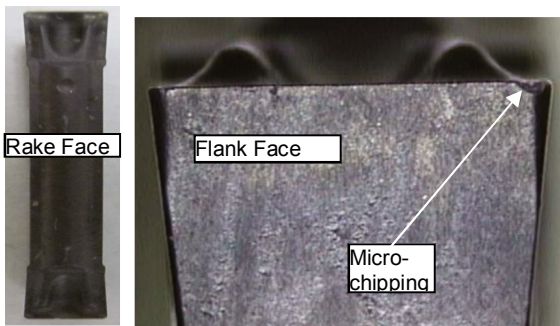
Flank wear for Tools 9 in Op 20 with baseline coolant for Input gear.
